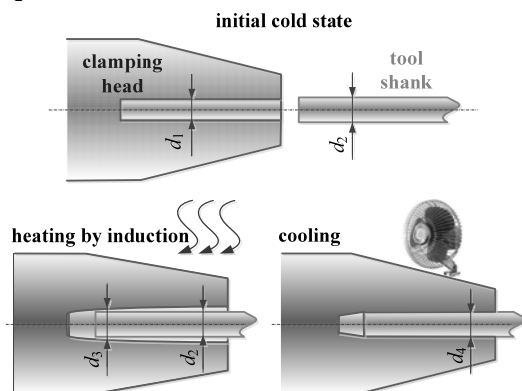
Induction clamping - shank tool is inserted into heated clamping head and system is cooled
